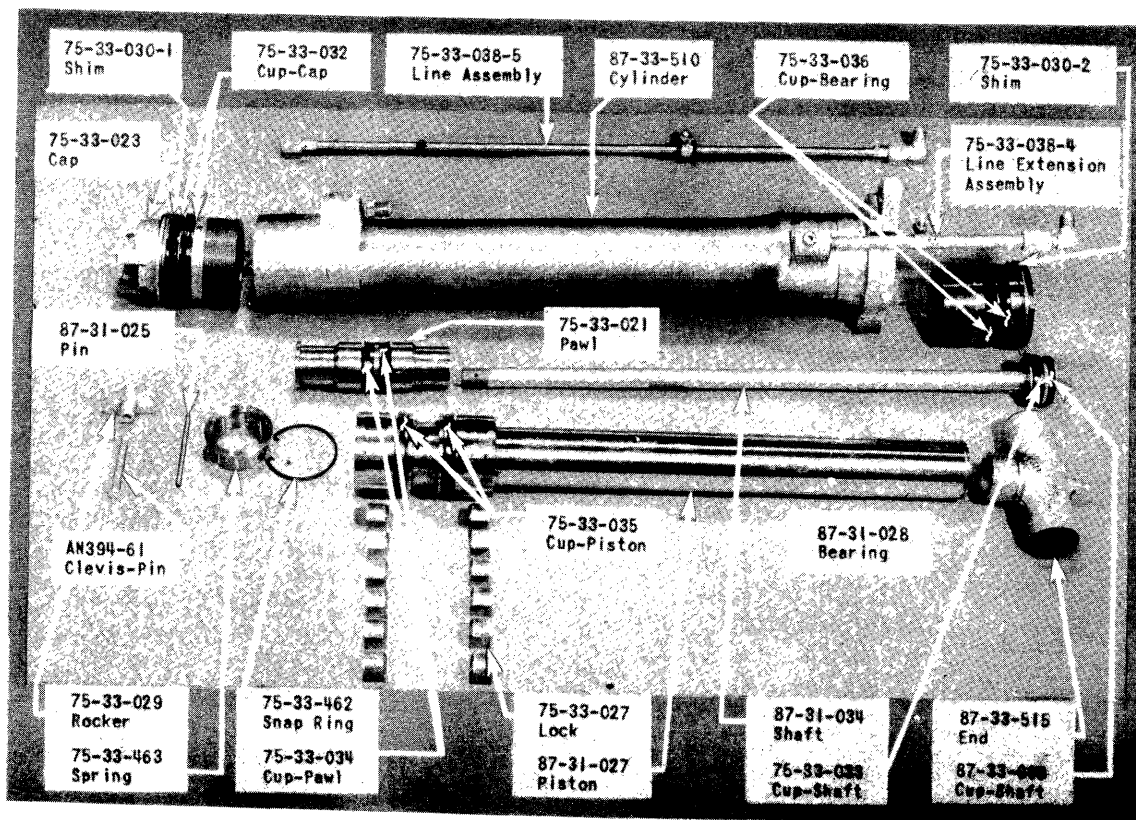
Retracting Cylinder Units with Cups Installed Prior to Assembly
